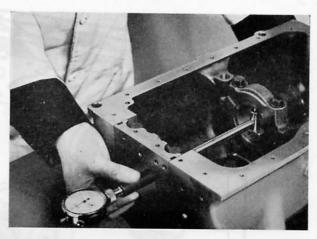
Checking the vertical diameter of a main bearing housing bore with a cylinder gauge used in conjunction with a micrometer
